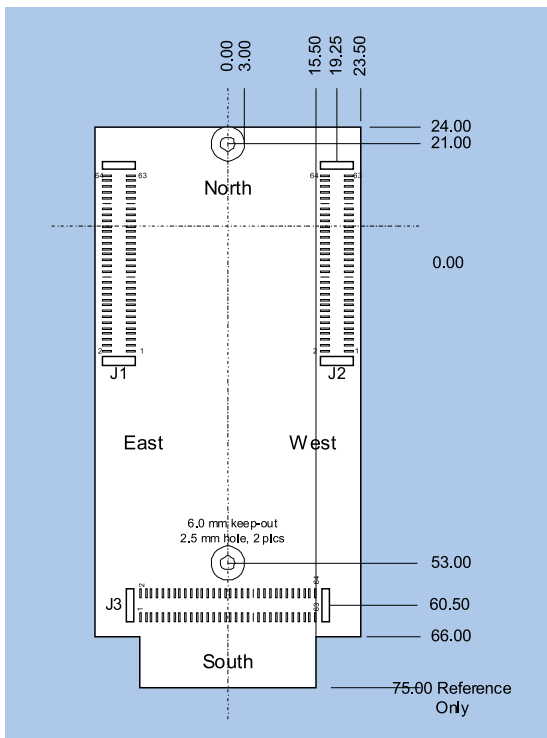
Outside dimensions of PC-MIP (Type I & Type II)
